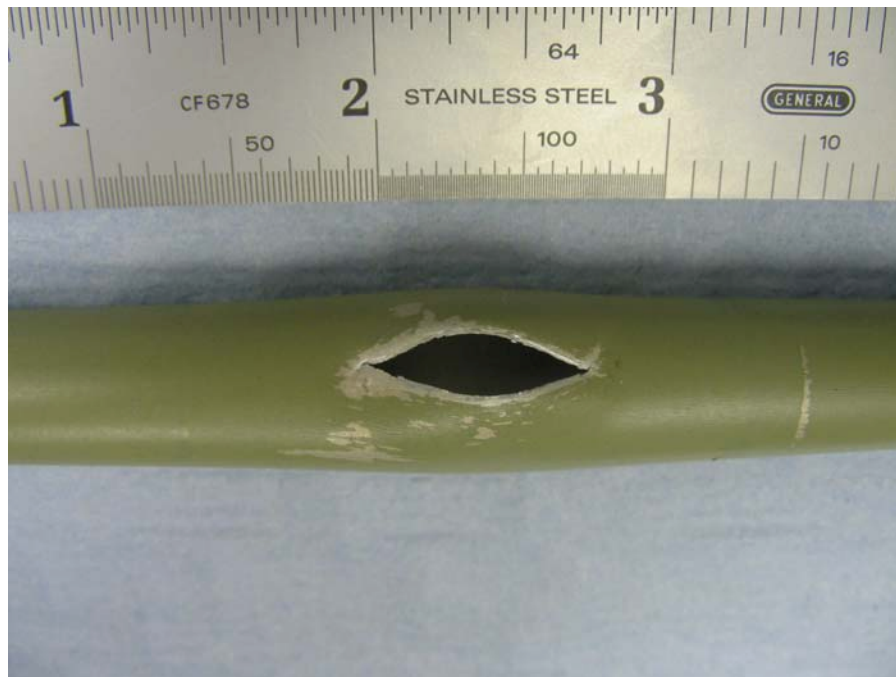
Close-up view of the tube burst. The shape and orientation of the burst was indicative of excessive internal pressure.
